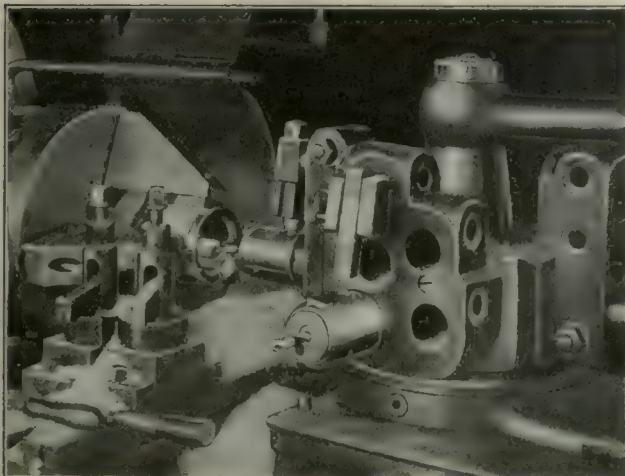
MACHINING FIELD CASES. FIG. 3—MACHINING GEAR-CASE COVERS
